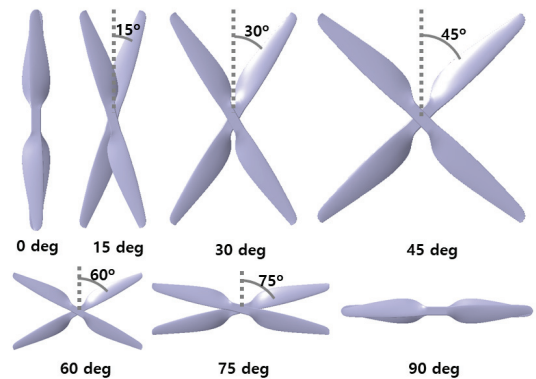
The Angle of the Upper and Lower Rotors at the Receiver Position
